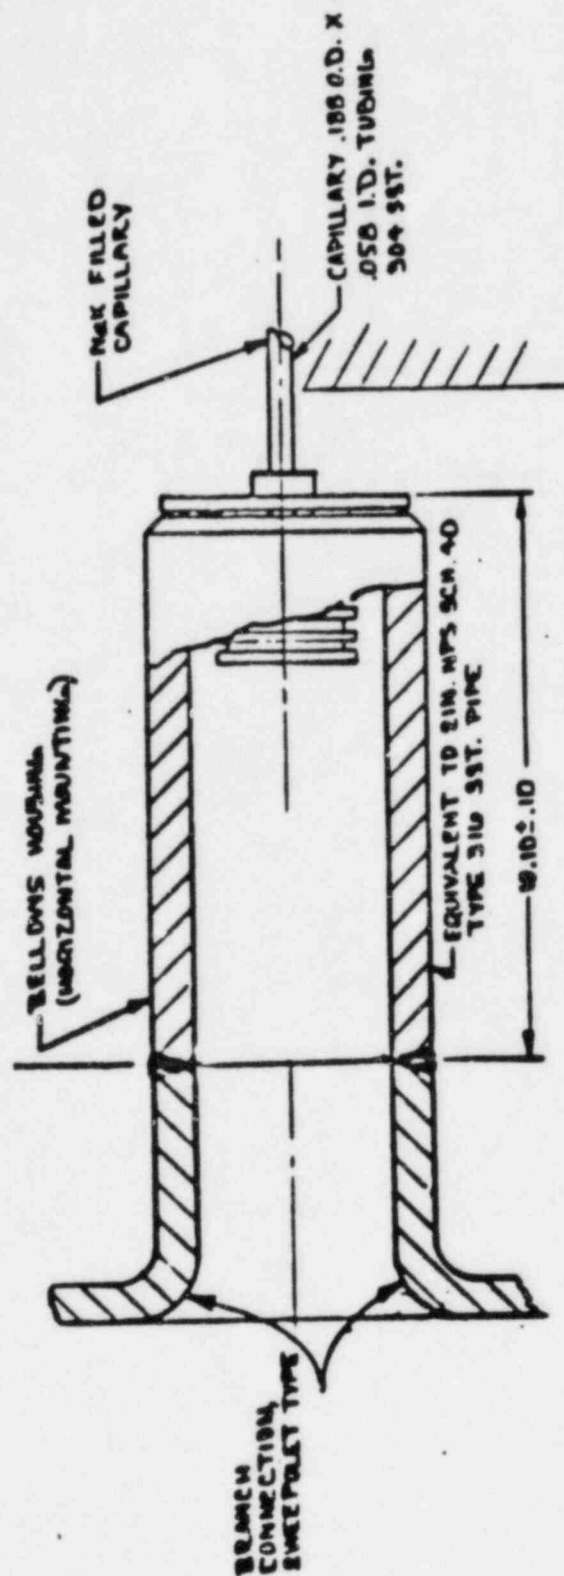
Pressure Sensor Installed in Branch Connection
